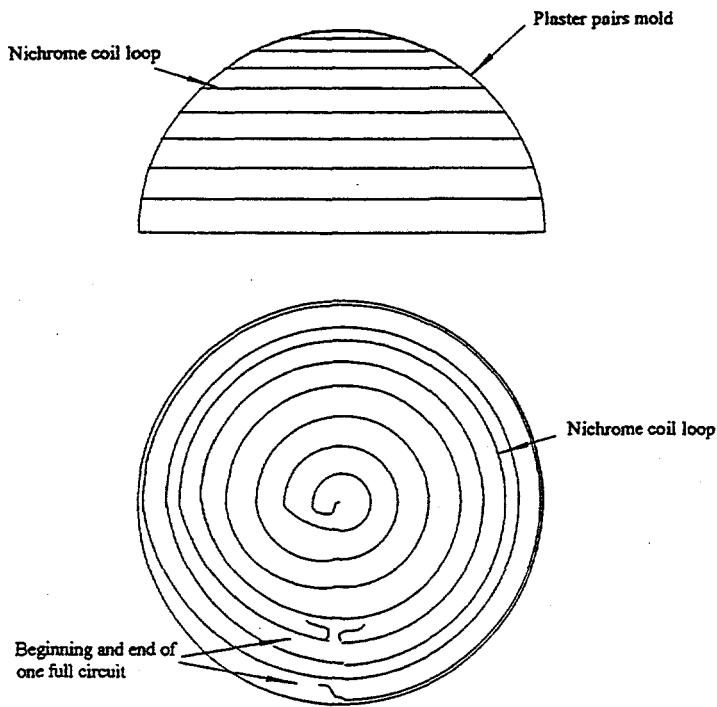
Top and Side Views of the Mold Used to Shape the Nichrome Coils.
